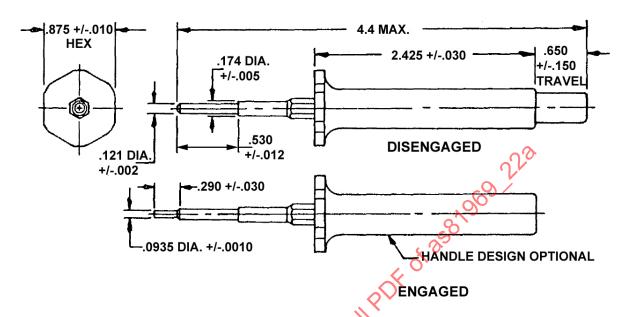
REMOVAL TOOL CONFIGURATION AND DIMENSIONS
